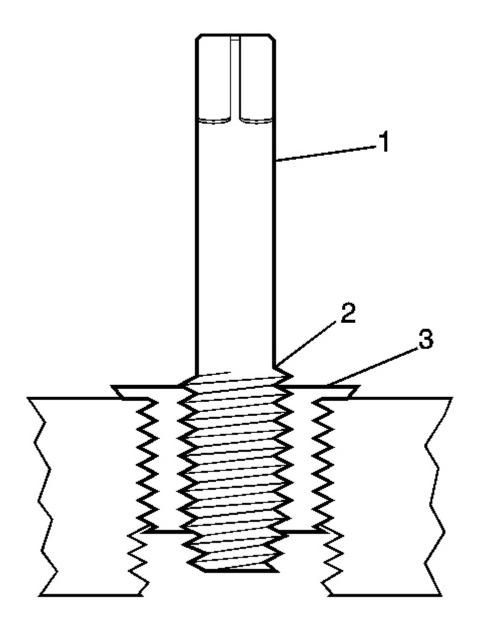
Installed Insert - Tapered Pipe Thread Repair
